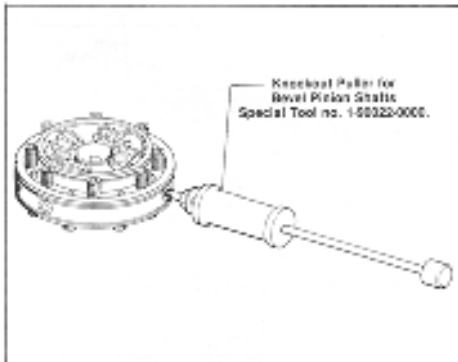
Removing Bevel Pinion Shaft with Puller.
